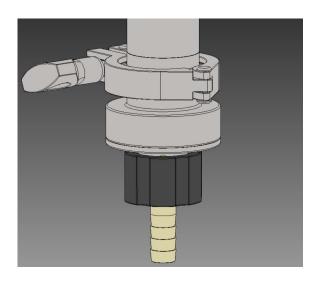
SAMPLE VALVE IN CLOSED POSITION
